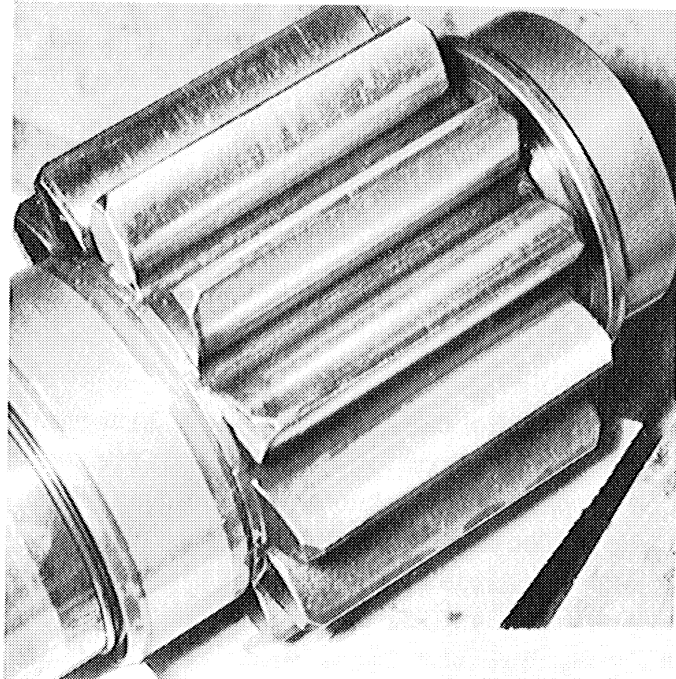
Sprocket drive pinion showing excellent condition after testing.
